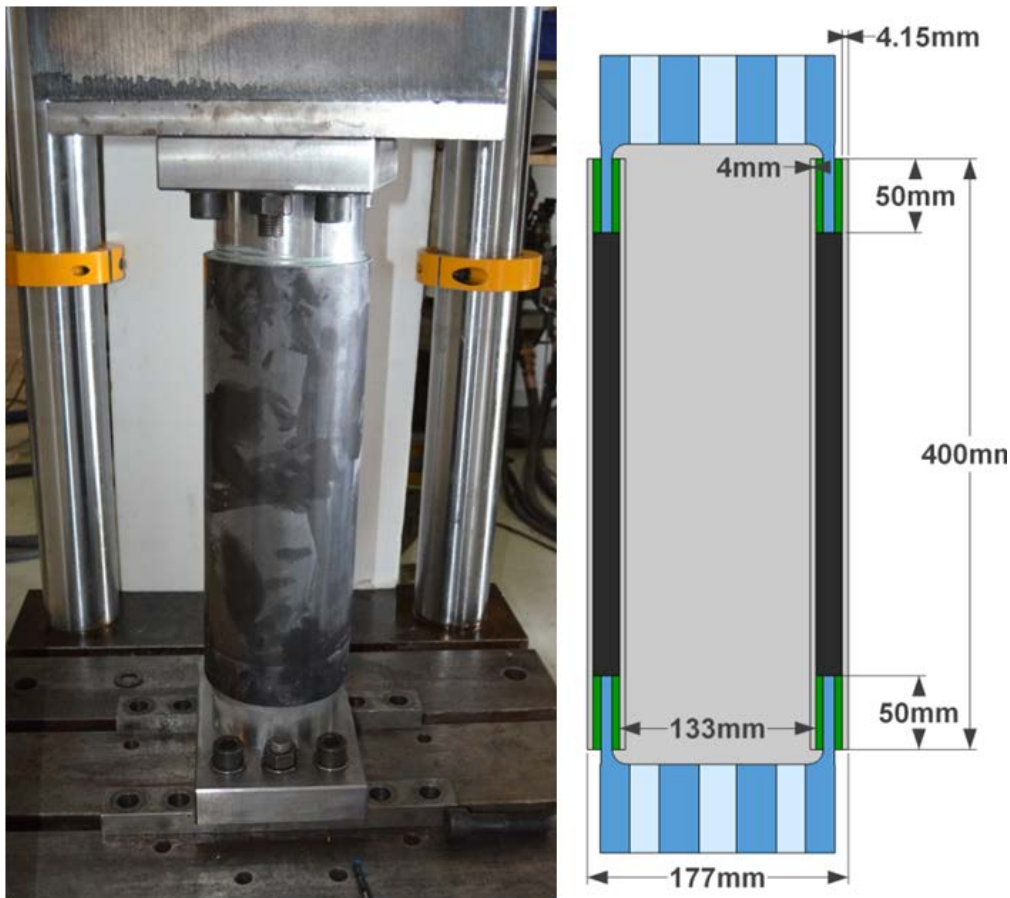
Sandwich - adhesive hybrid symmetrical joint
